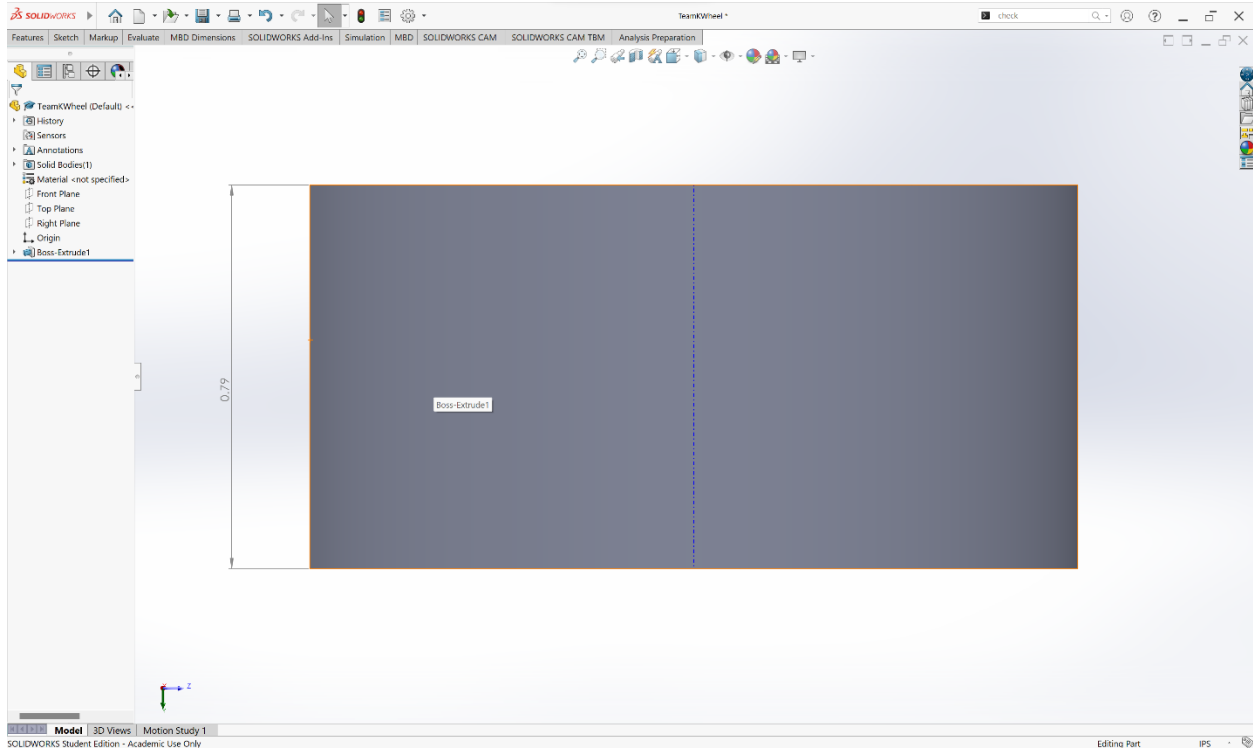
This is the side view of the axle which shows the diameter of our axle rods.
